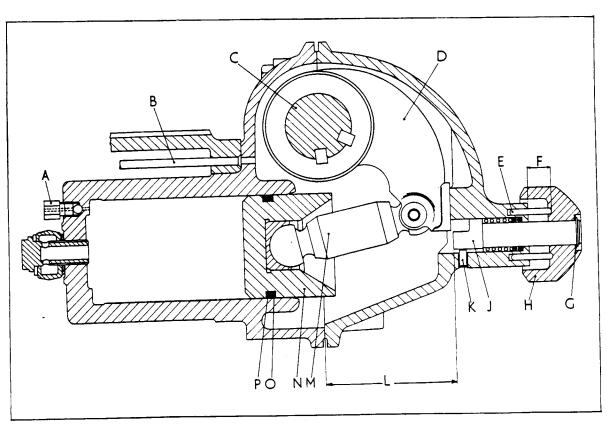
SECTION THROUGH RAM CYLINDER (Later model tractors)
